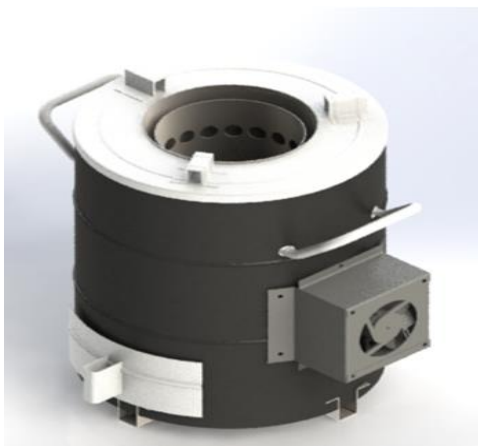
Complete 3D Assembly Drawing of the Biomass Gasifier in Solidworks
